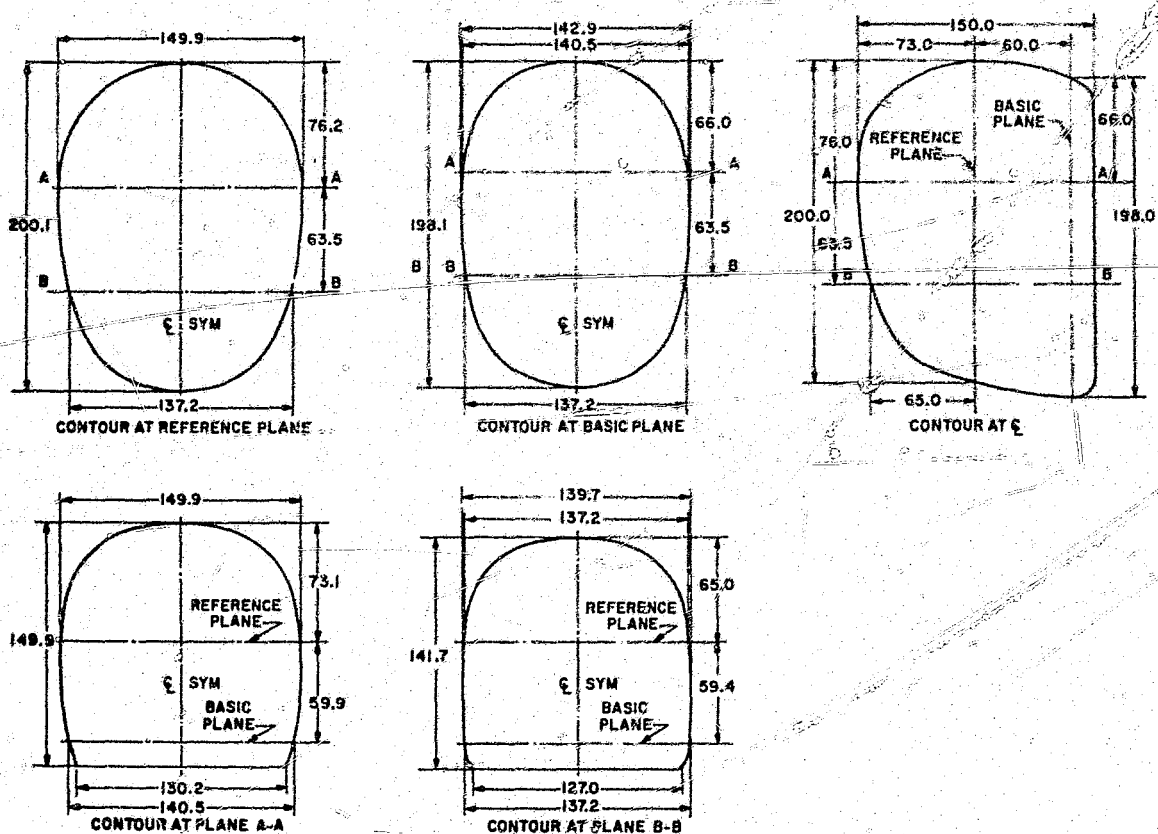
Size 7 1/4 test headform, dimensions in mm.
